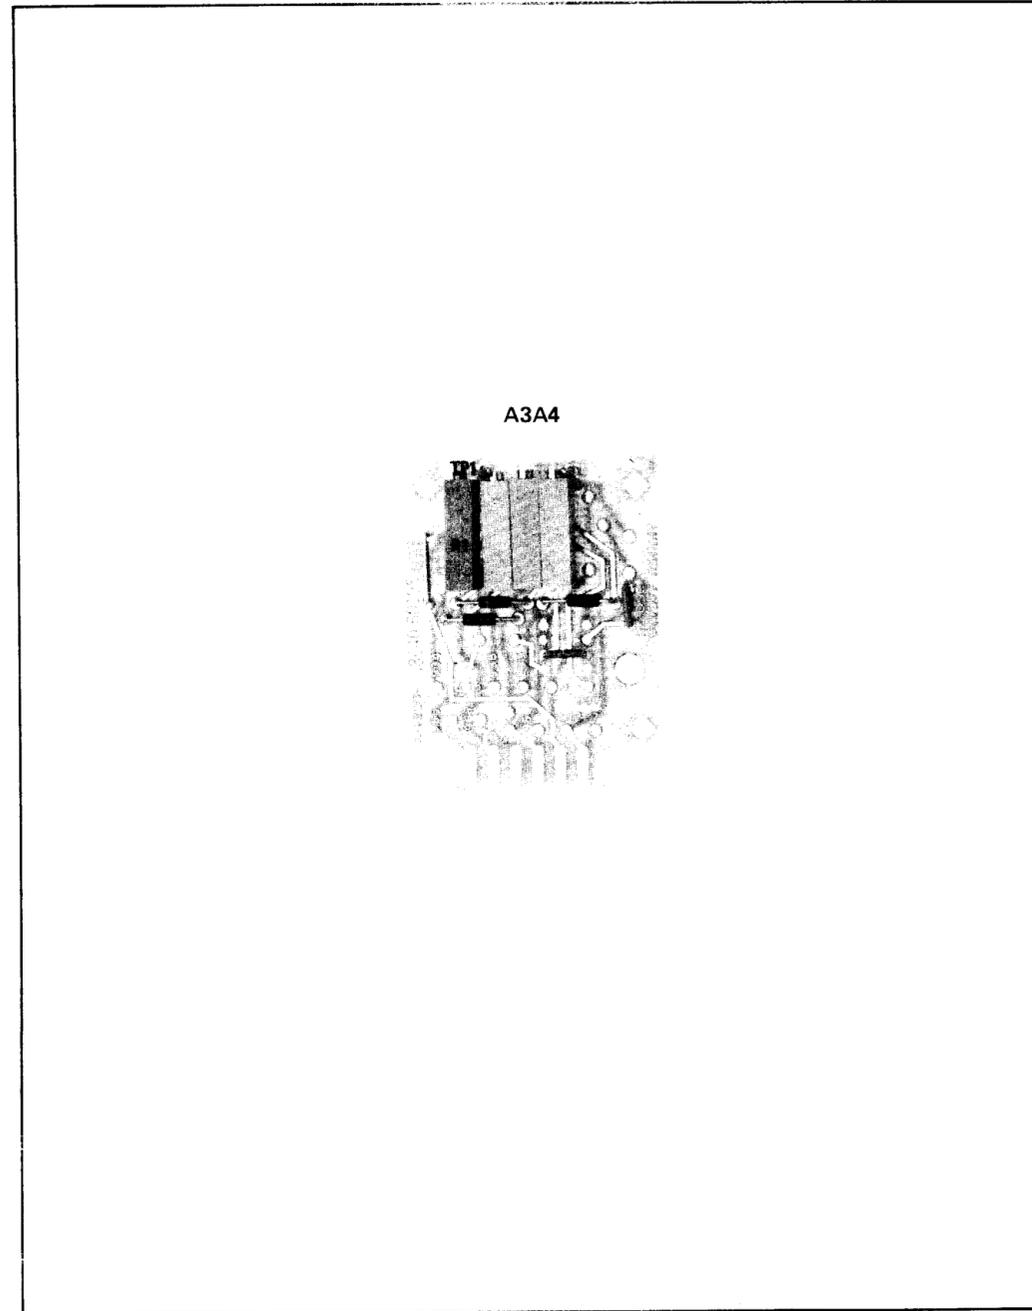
P/O A3A4 Connector Board Assembly Component Locations
